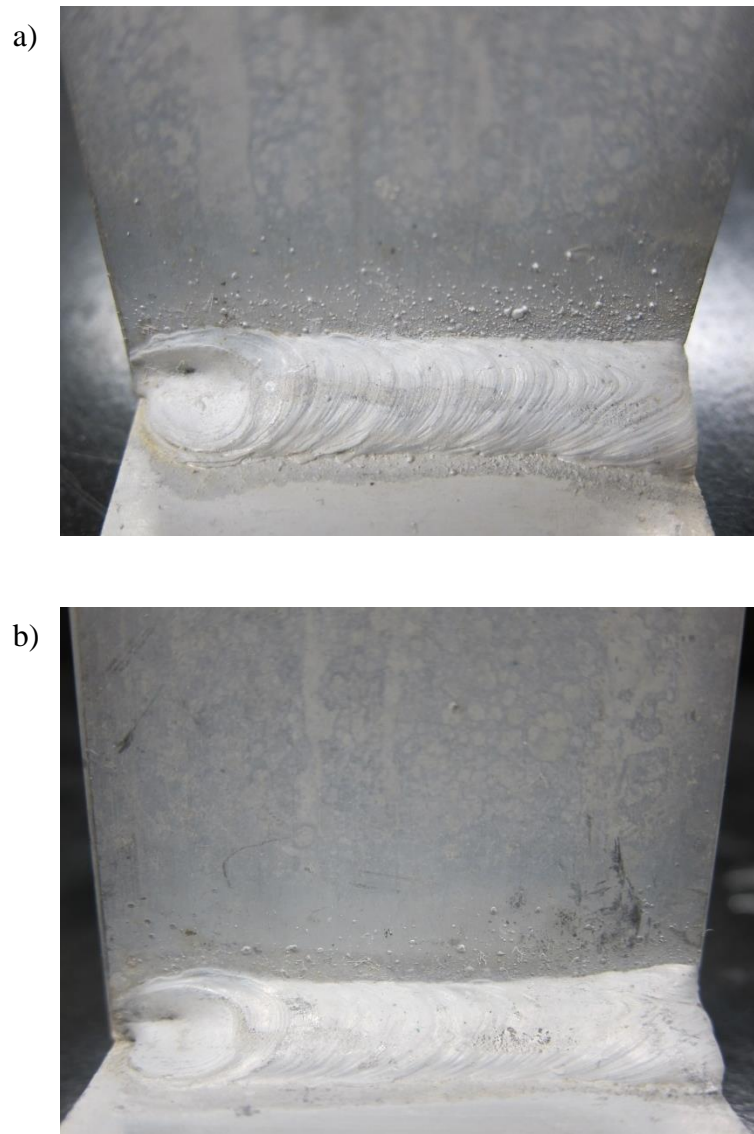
Close-up images of T-joint welded configuration E (ER5356/AA7003/L) in the (a) as-welded T6 condition and (b) as-welded T6+PB condition post exposure to GMW-14872.
